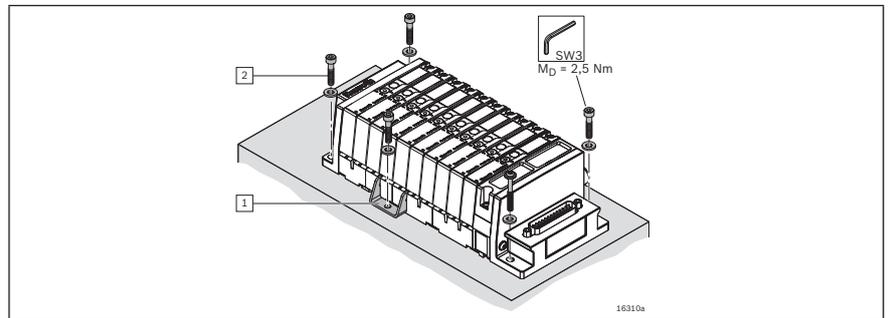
Direct mounting of the valve system on a flat surface with screws (2) and retaining brackets (1), example: AV03 series
